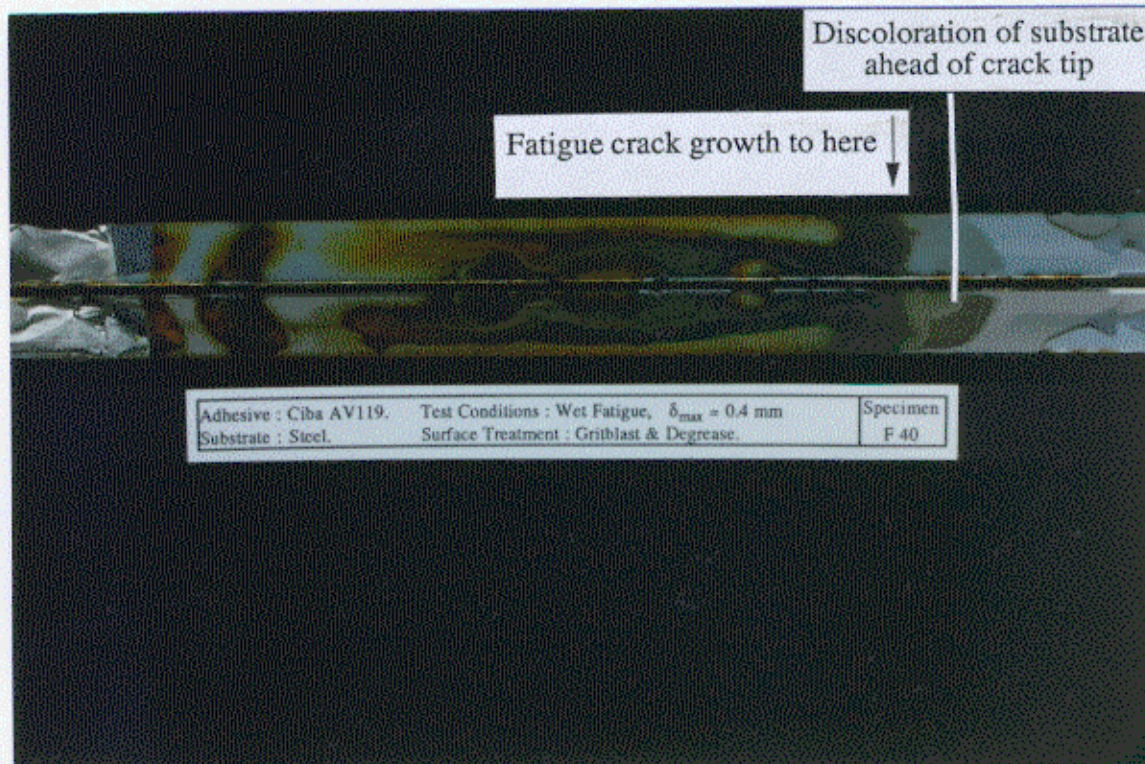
Fracture surface of steel specimen bonded with 'AV119', tested 'wet', showing areas of cohesive-in-adhesive failure (cream) and discoloration ahead of crack tip.
